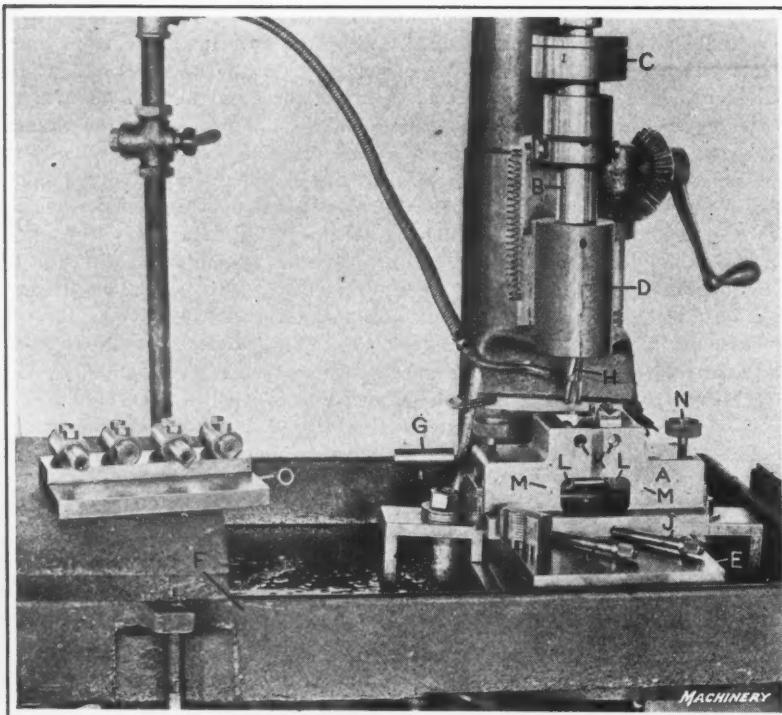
Drilling Machine and Two-station Jig used for Counterboring Operations
